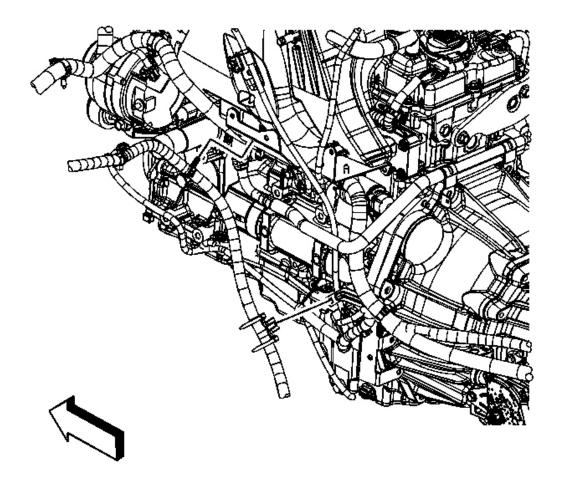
Identifying Intake Manifold & Attachments Courtesy of GENERAL MOTORS CORP.
